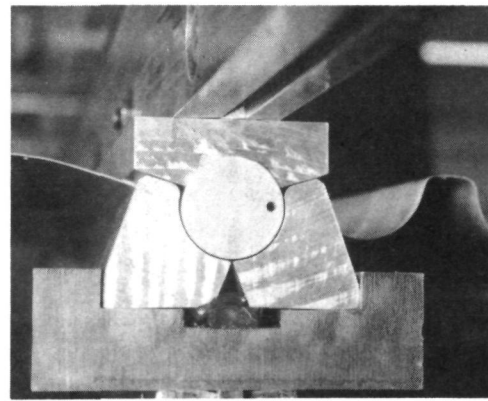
BRAKE FORMING IN STANDARD BRAKE MACHINE
